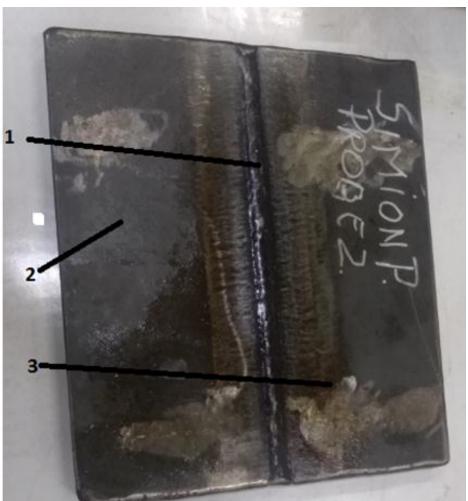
The welded sample subjected to ultrasonic control 1-welding seam; 2 and 3-butt welded sheets
